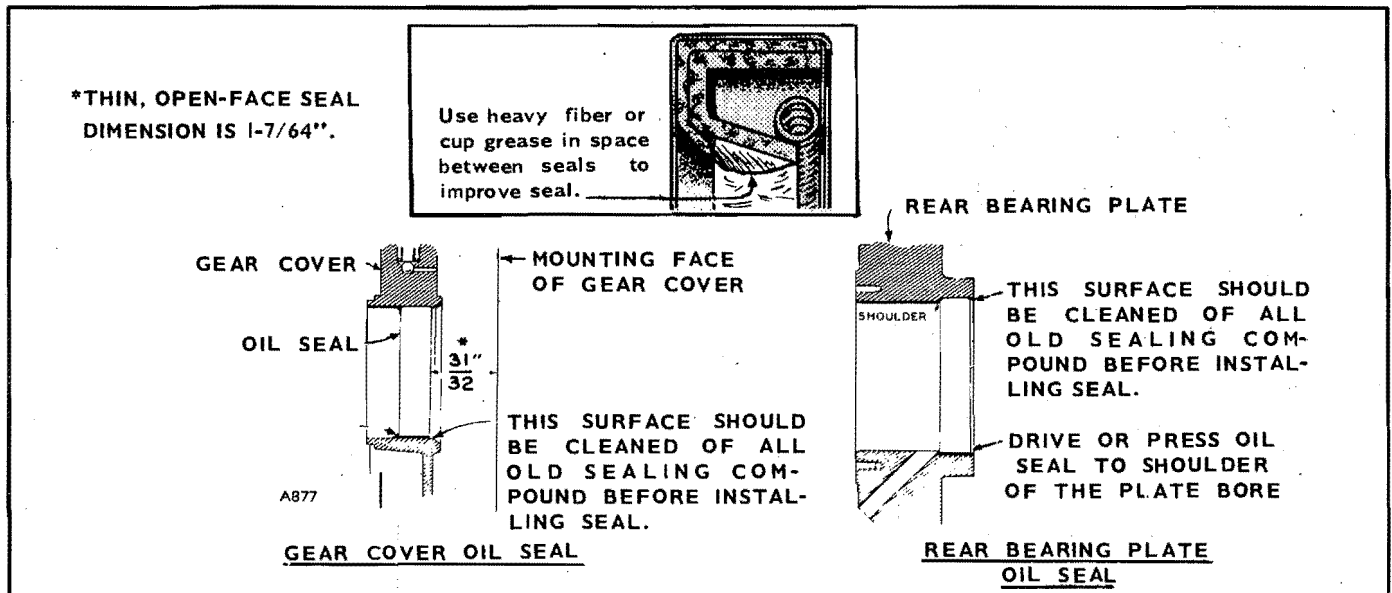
GEAR COVER AND REAR BEARING PLATE OIL SEALS
